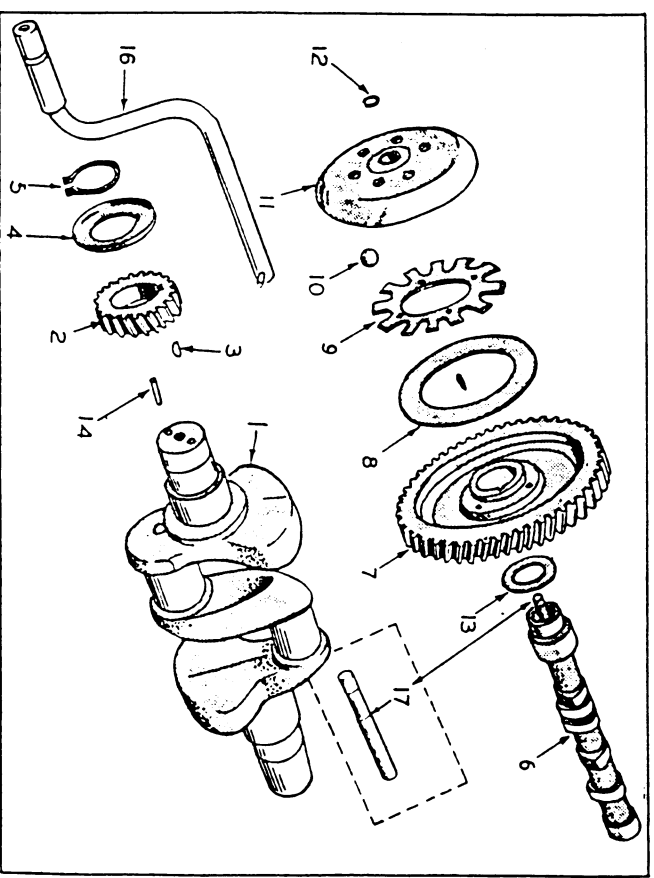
FIG. F - CRANKSHAFT & CAMSHAFT GROUP
